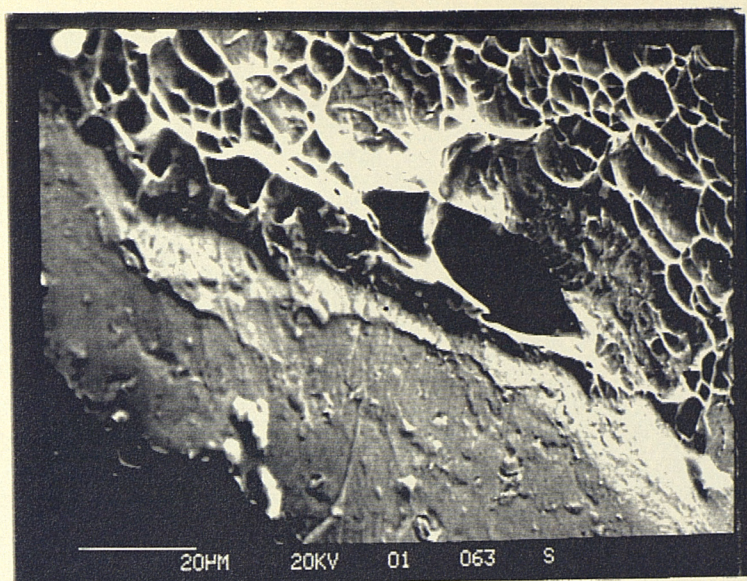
Weld induced crack root in WBL-3794.
